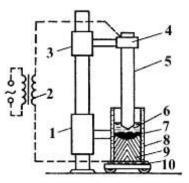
Electroslag remelting: 1 – mould lifting carriage; 2 – transformer; 3 – electrode replacing mechanism; 4 – holder; 5 – comcumable electrode; 6 – liquid slag; 7 – liquid metal; 8 – mould; 9 – ingot; 10 – bottom
